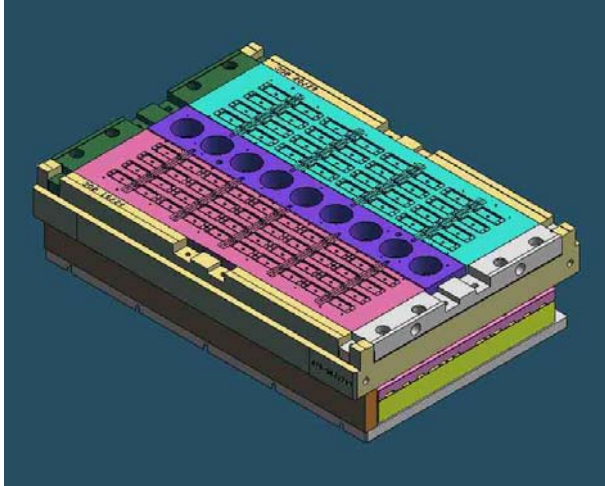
Layout of a semiconductor packaging mold (bottom mold)
